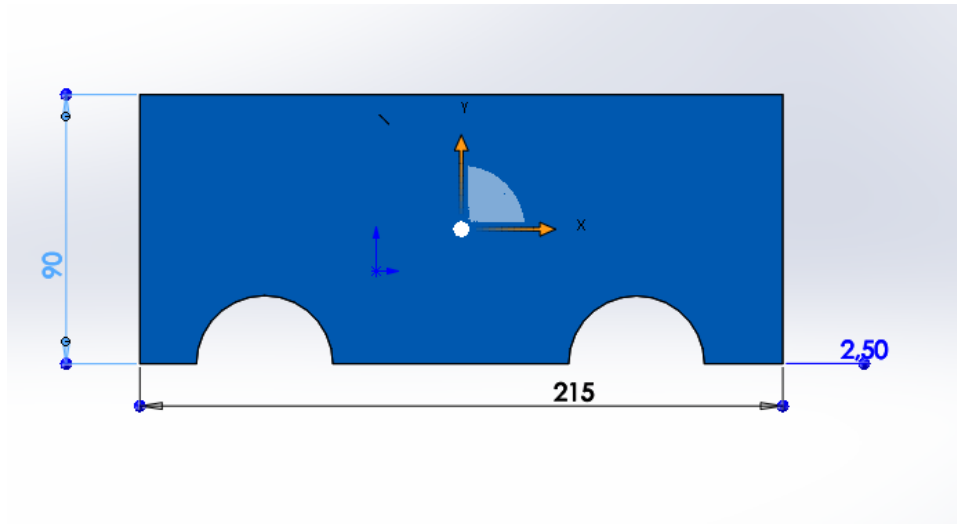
Dimensional Measurements of Side part in SolidWorks
